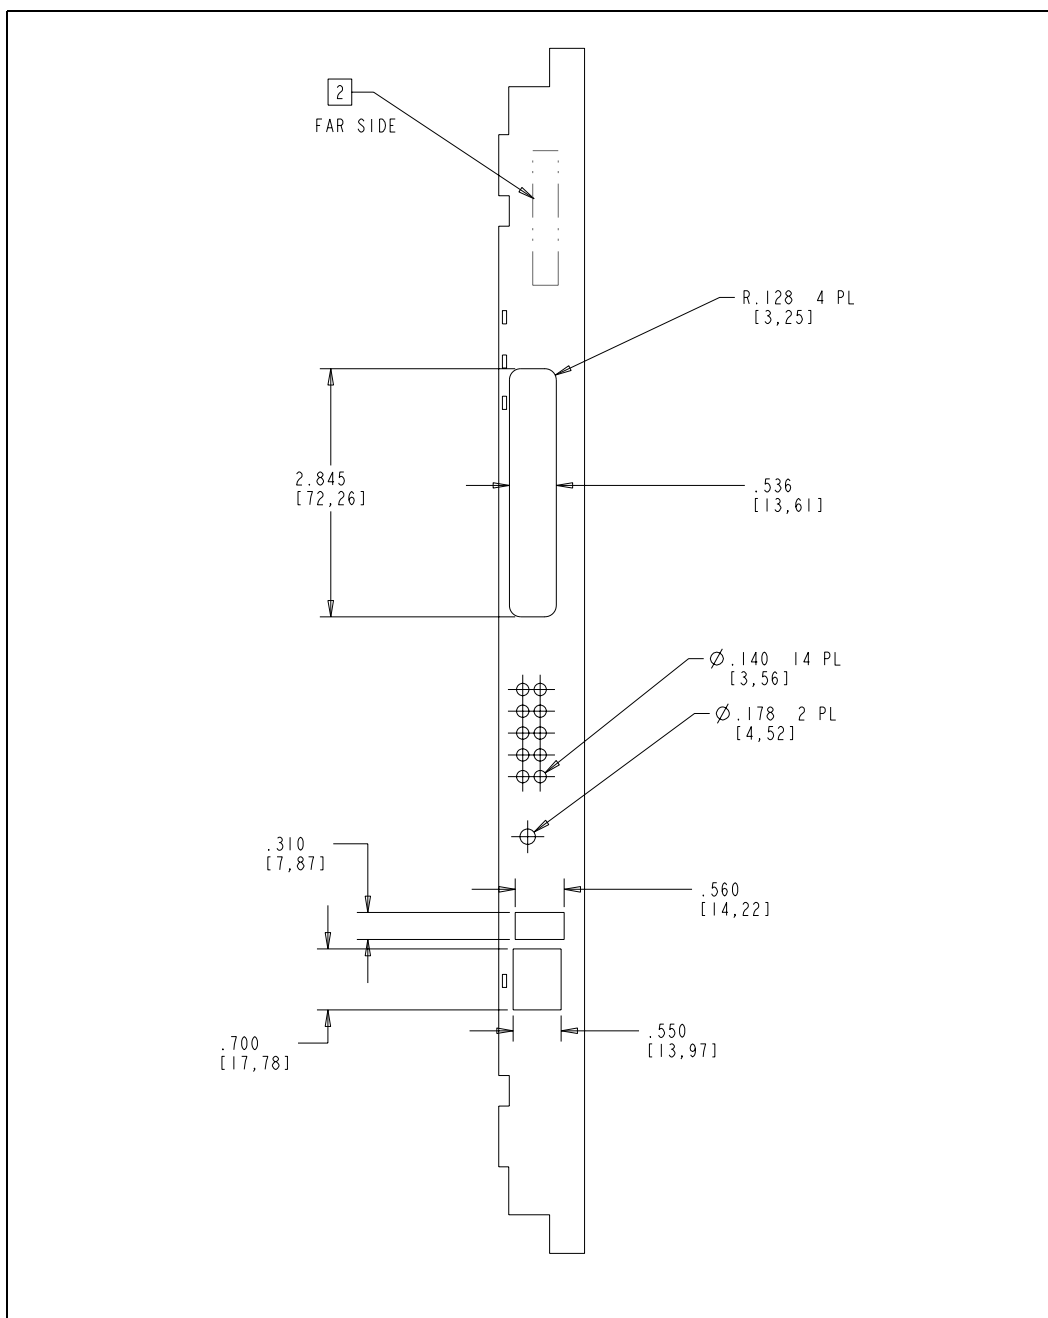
MPCBL0001 SBC Front Panel Dimensions – FC SKU (Screws and LEDs)
